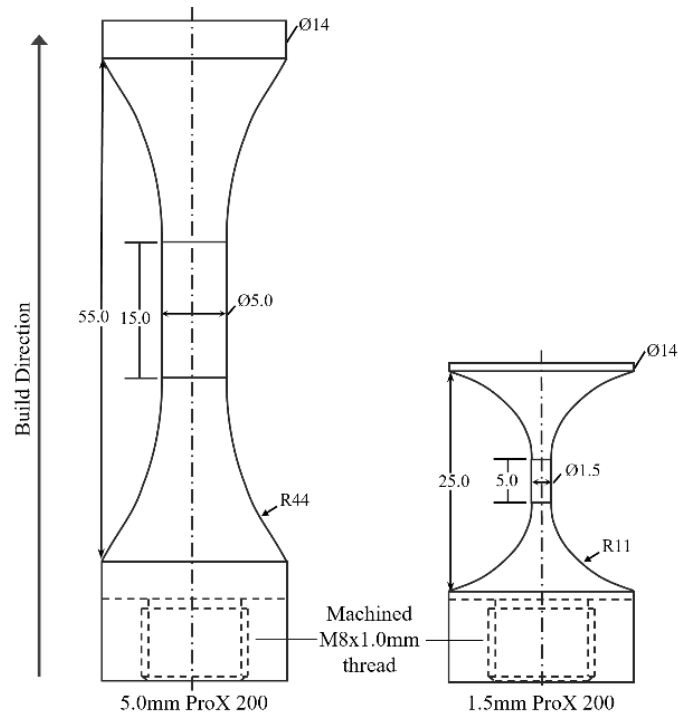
As-printed specimen geometry for 5.0 mm and 1.5 mm diameter dog-bone ultrasonic fatigue tests. Dashed lines represent final specimen geometry after machine threading.
